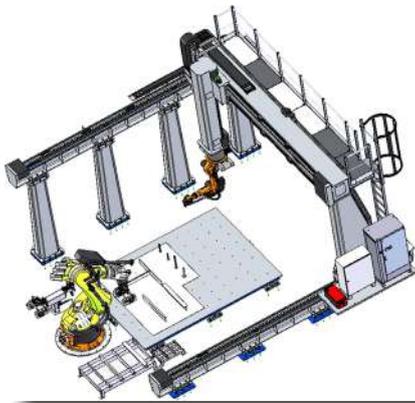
General view of the robotic cell design for the assembly and positioning of elements in component assembly.
